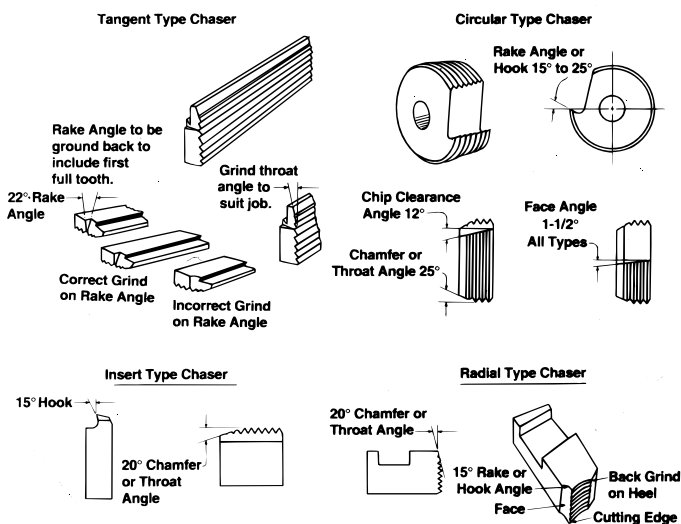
Typical thread chasers used for stainless steels, with suggested geometries.
